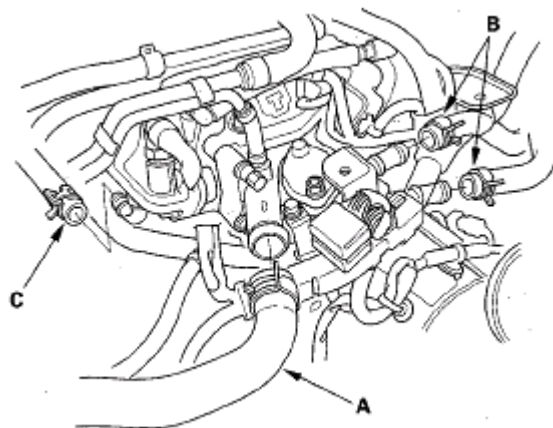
Identifying Upper Radiator Hose, Heater Hoses & Water Bypass Hose
